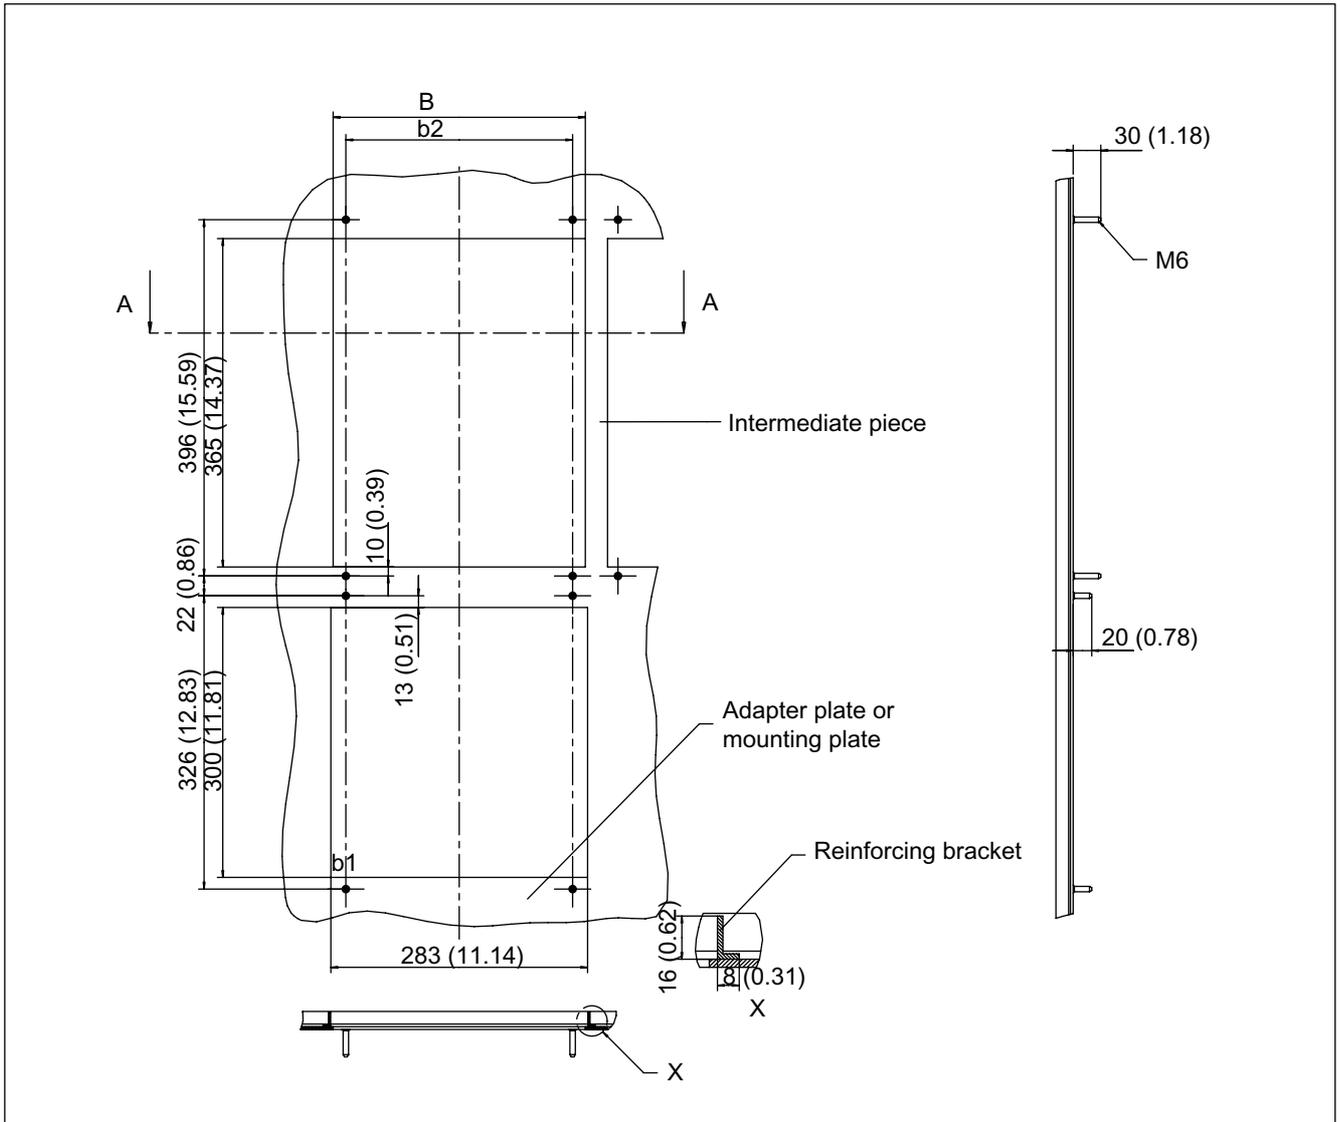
Installation openings for the power unit with external air cooling, 300 mm
